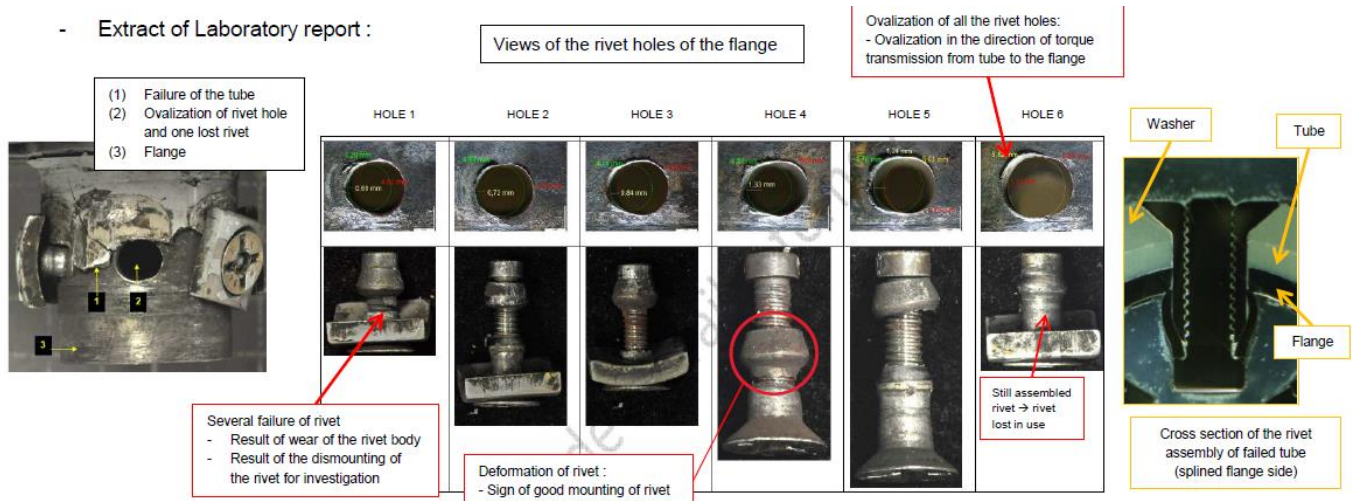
Rivets and rivet holes in adapter. Photos: Airbus Helicopters
